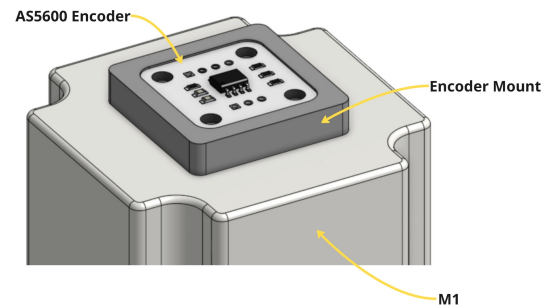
AS5600 encoder module mounted below M1, with the diametrically magnetised disc magnet press-fit to the motor shaft. A PLA magnet holder maintains the required 0.5 mm axial air gap.
